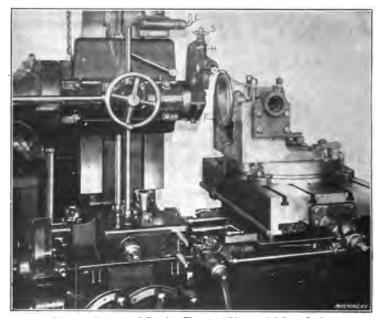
Facing and Turning Flange of Differential Gear Casing
